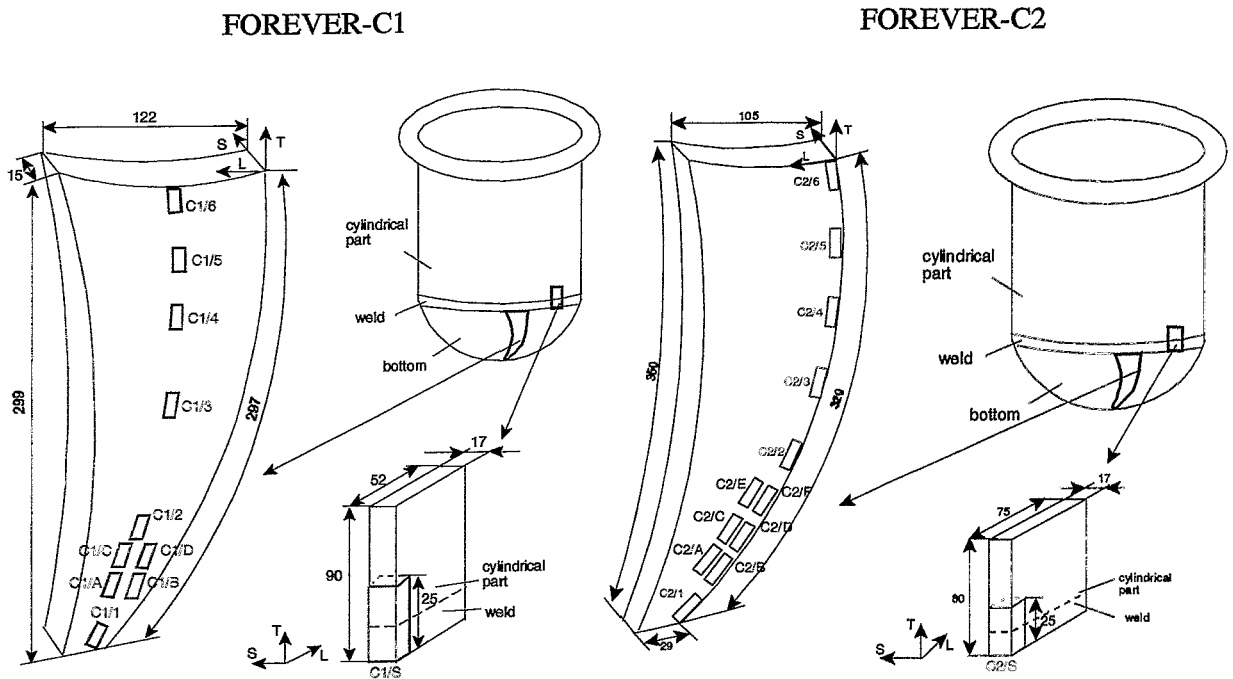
Sampling of the hemispherical part and the cylindrical part with weld
